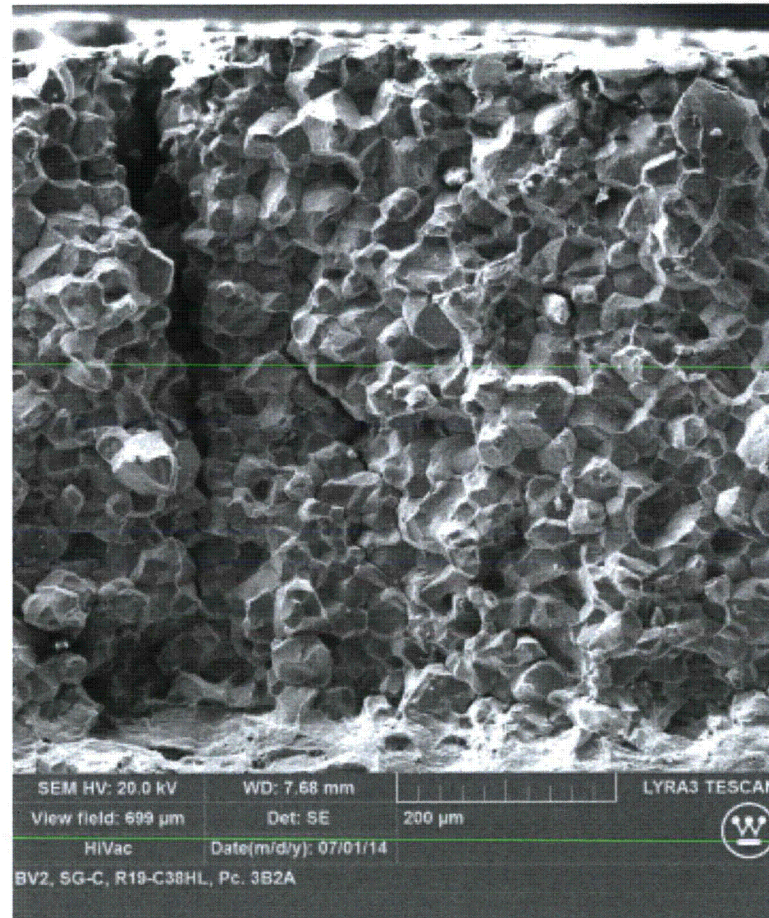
Example of R19C38-3B Burst Opening Fracture Surface (Center of Crack)
